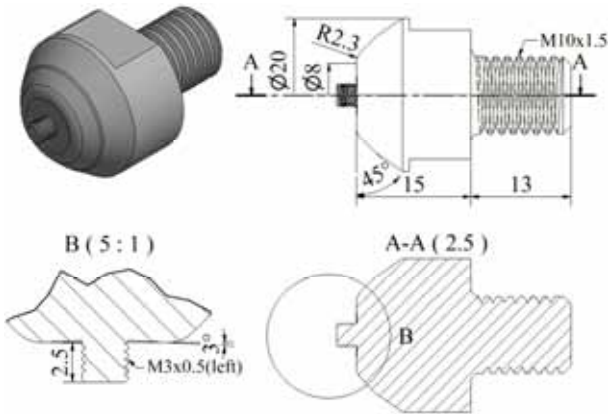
Geometry of the tool used for post-processing MIG welded plates (dimensions in mm).
